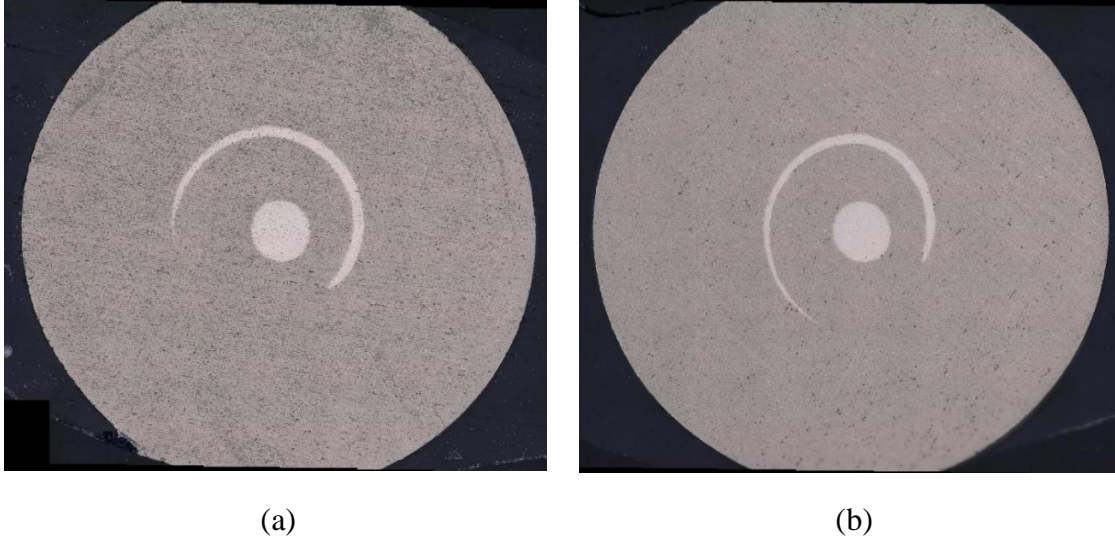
Cross sections from extrusions performed at 300 rpm and 16 mm/min. (a) flat die extrusion. (b) scroll die extrusion
